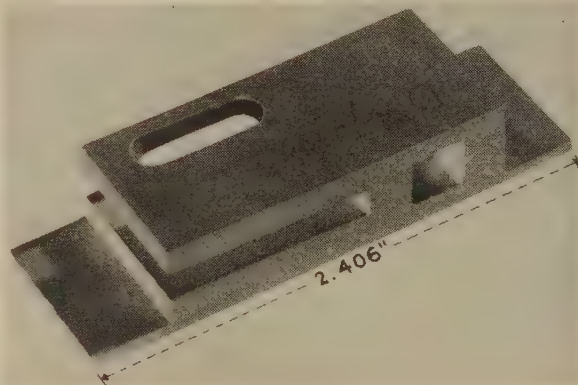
A precision investment cast part for an oxyacetylene blowpipe.
